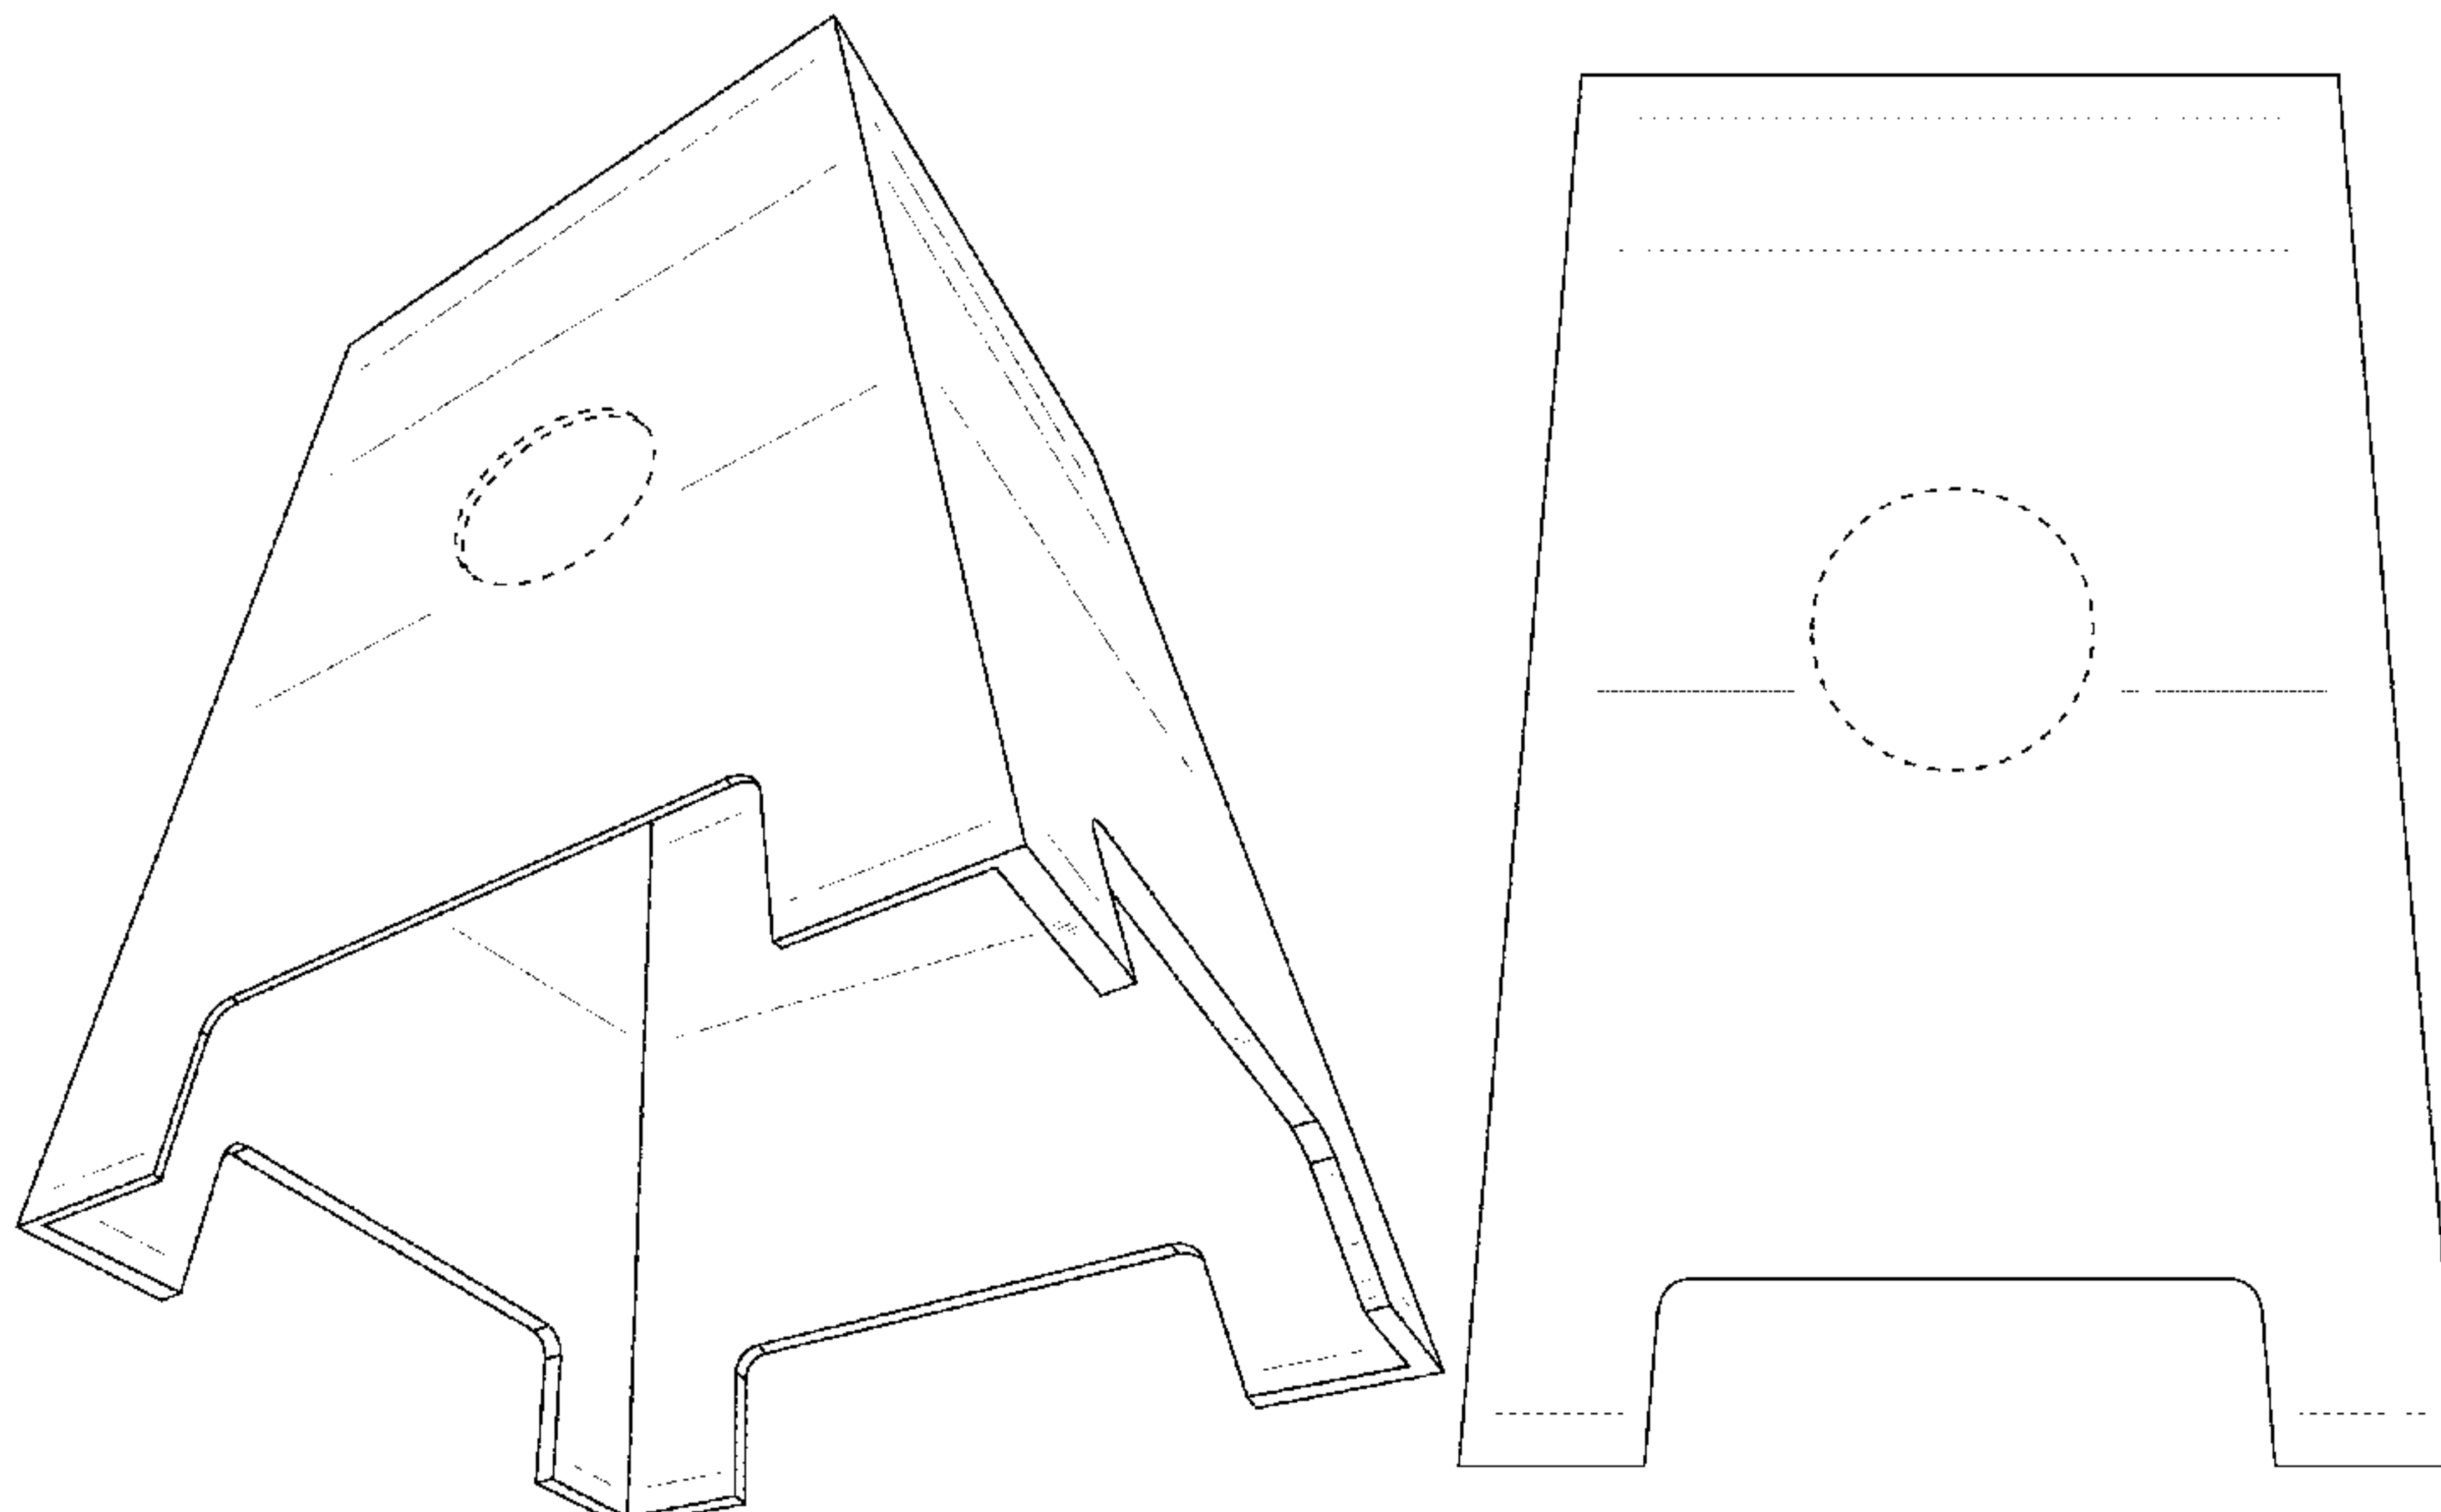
is a side view of the box drum of FIG. 6. The right side view, left side view and back view of the box drum of FIG. 6 are the same;
